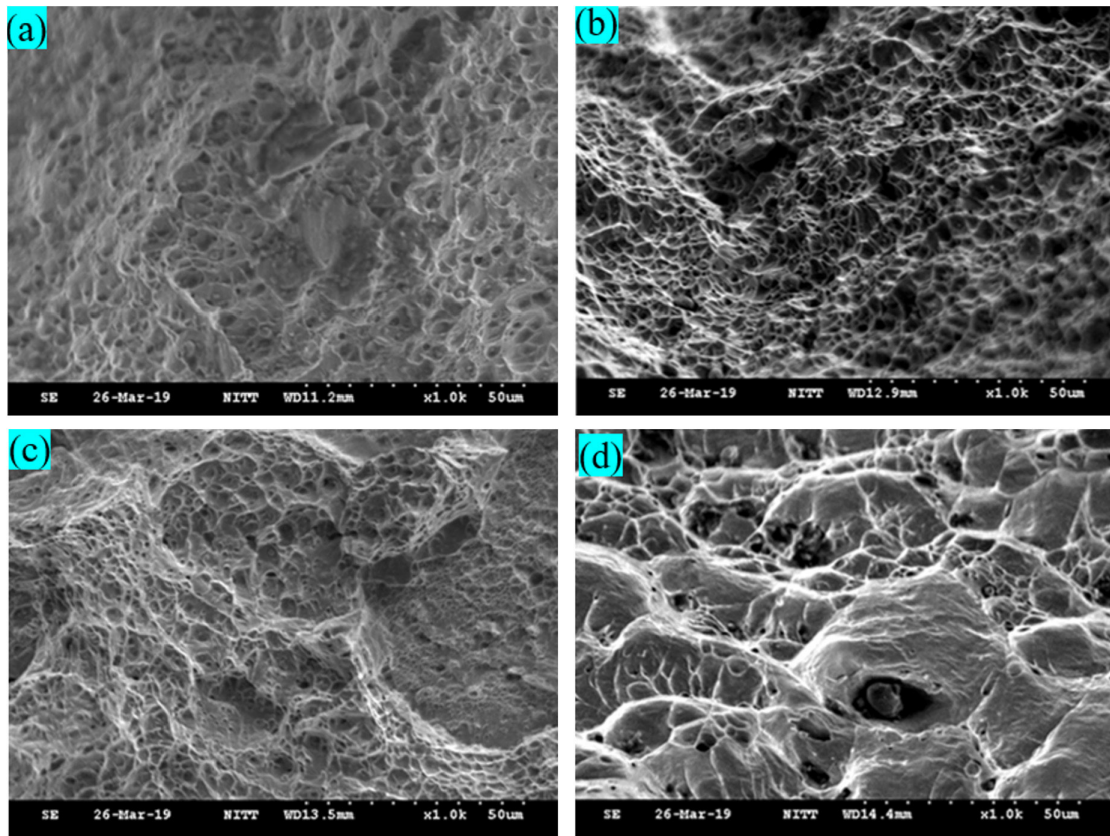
Fractographical analysis by impact test (a) base metal (b) welded (c) HAZ and (d) TMAZ of welded samples.
